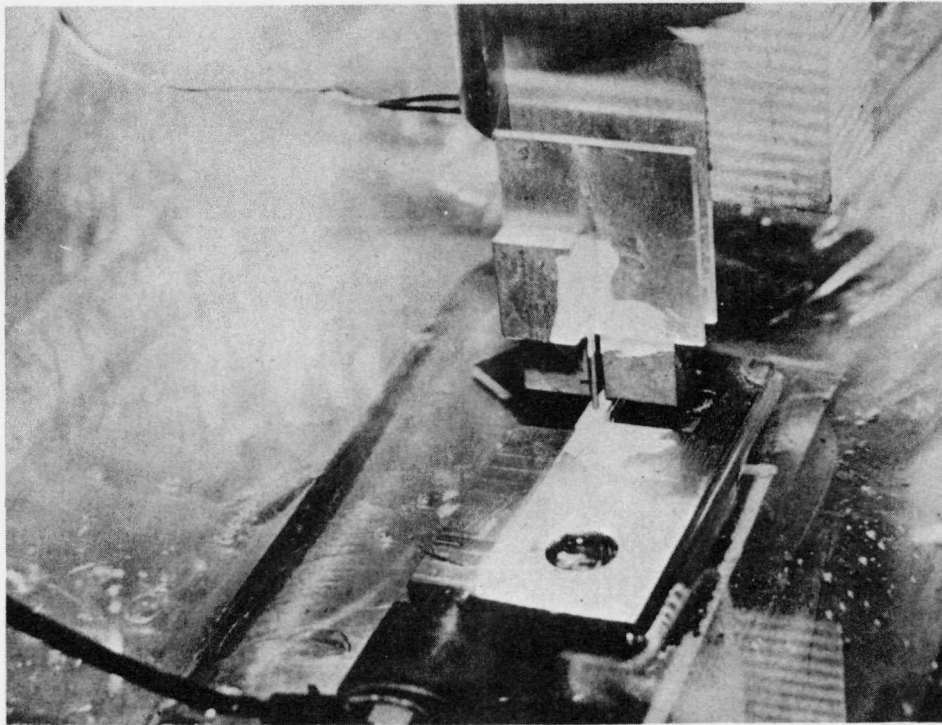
View of EDM Setup Used to Fabricate Tensile Specimens
